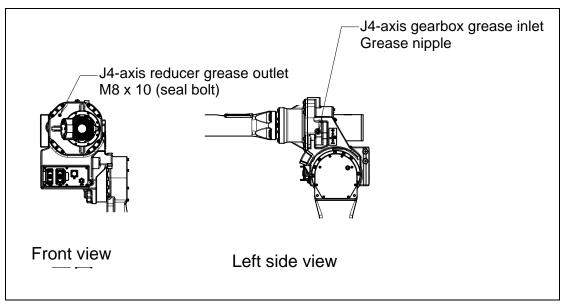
(d) Replacing grease of the J4-axis gearbox
